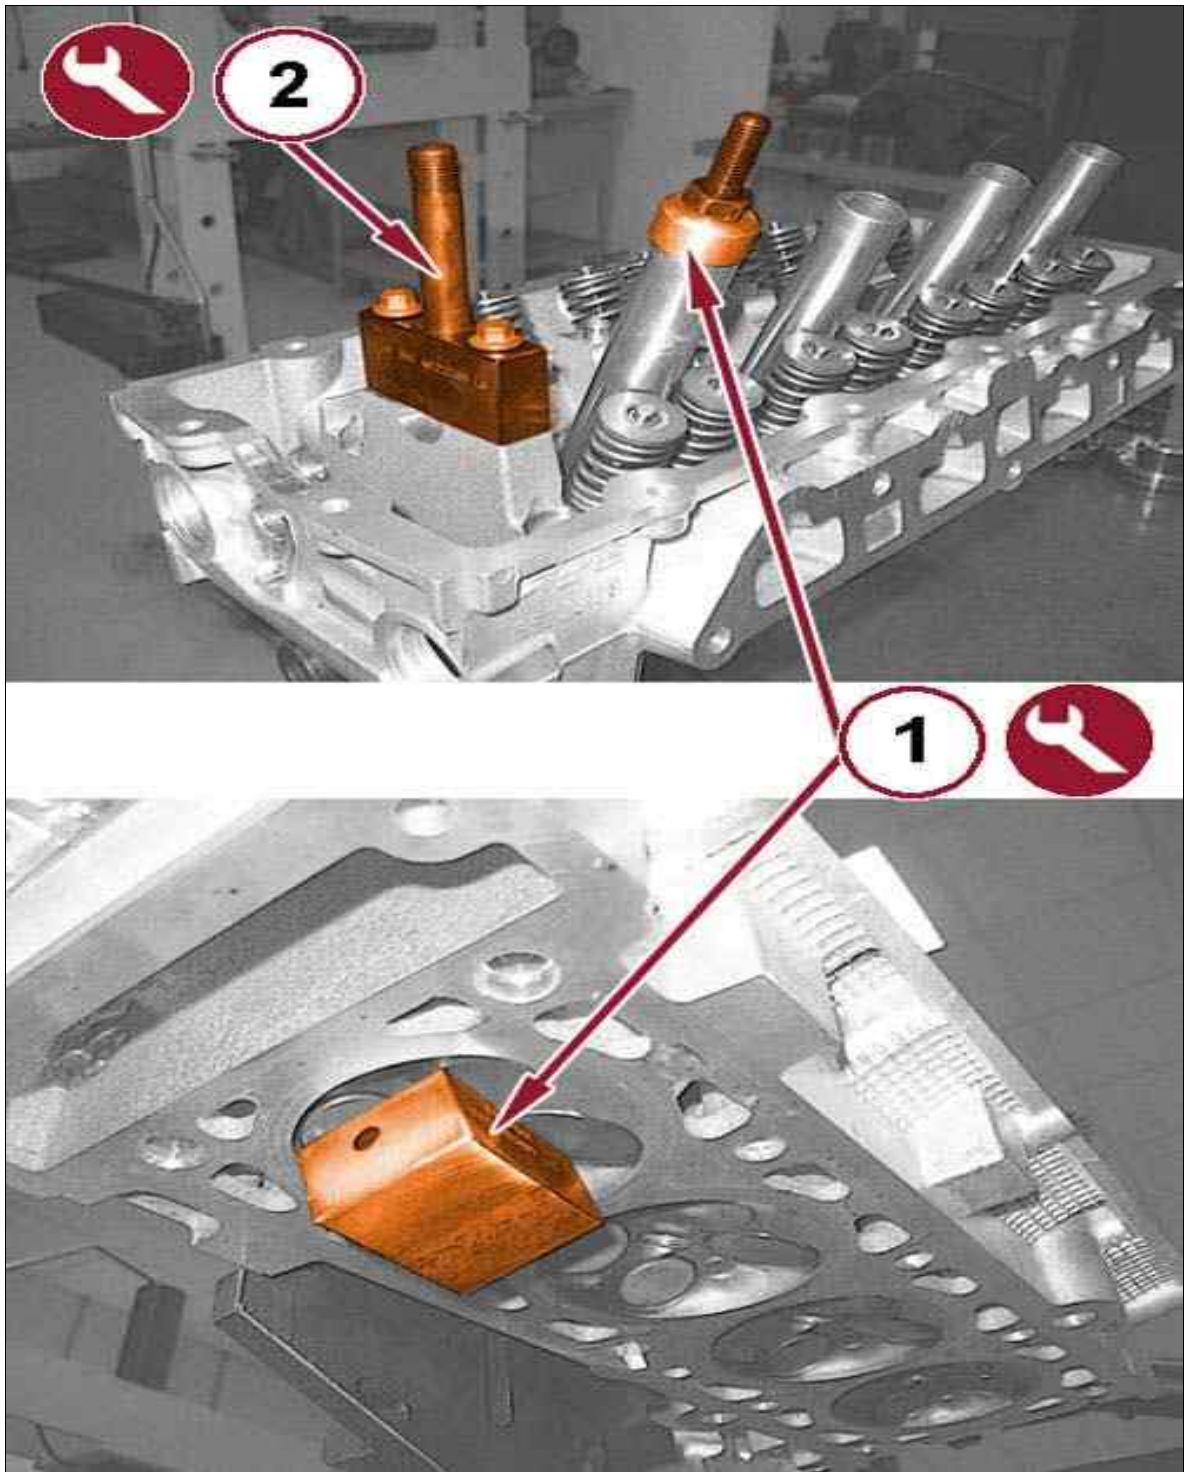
Placing Cylinder Head In A Vise Using Support Tool
